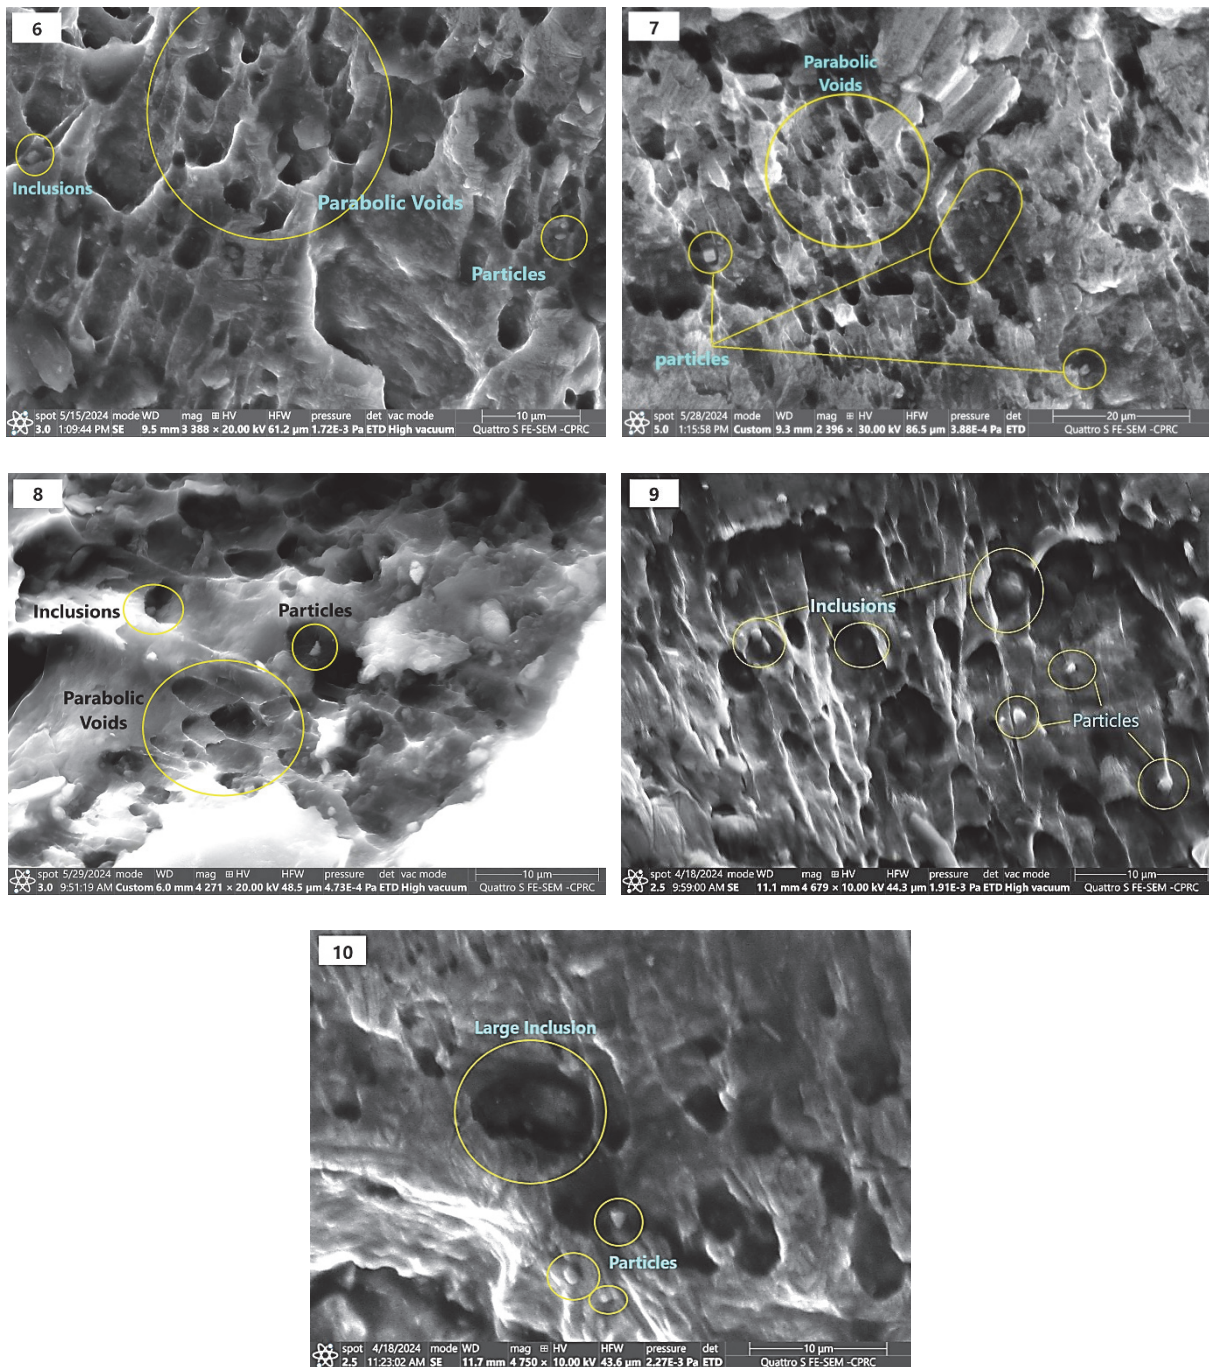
SEM photographs of the fractured surface of the specimens of aluminum 1100.
